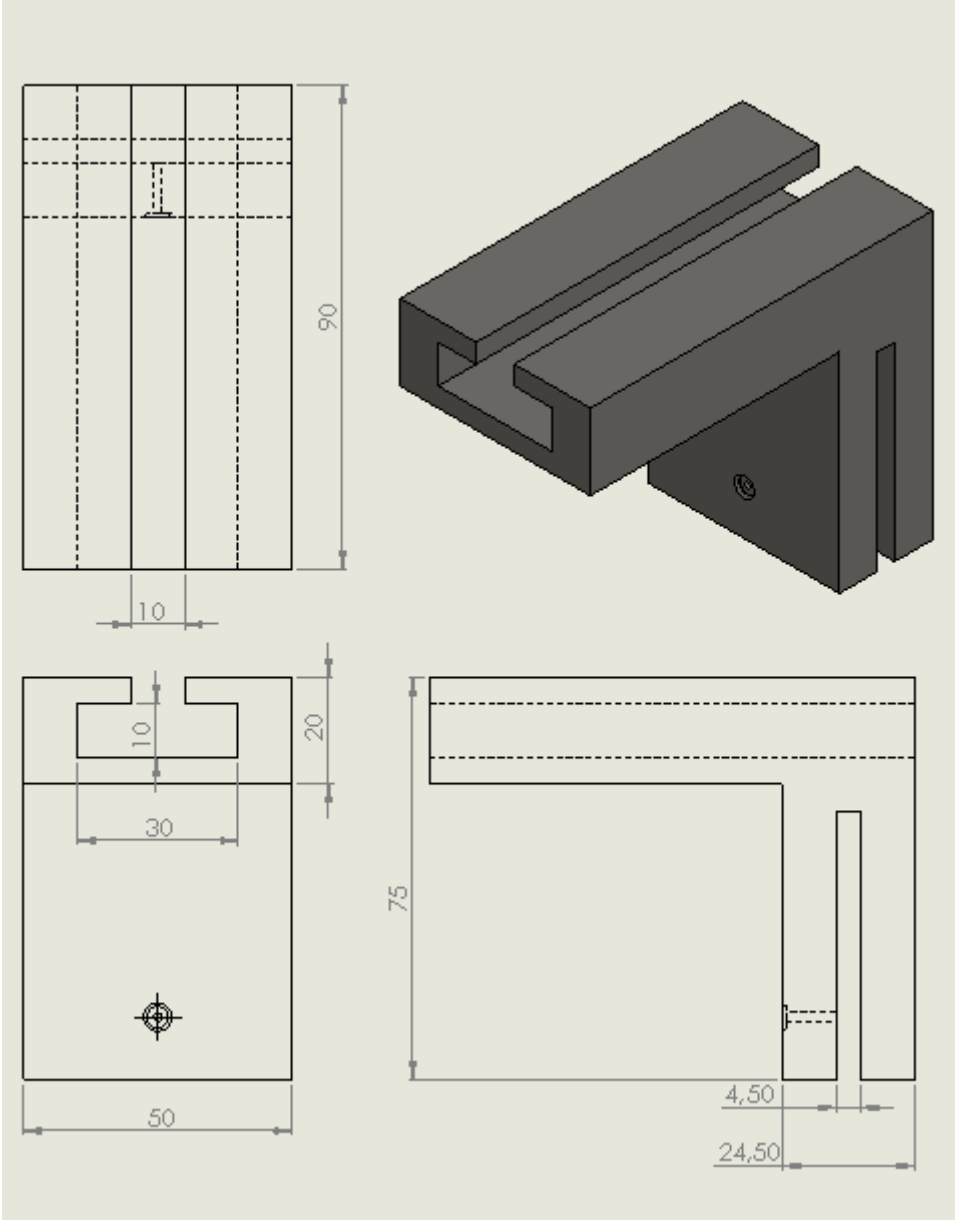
Drawing of the “PH mounting foundation” with dimensions.
